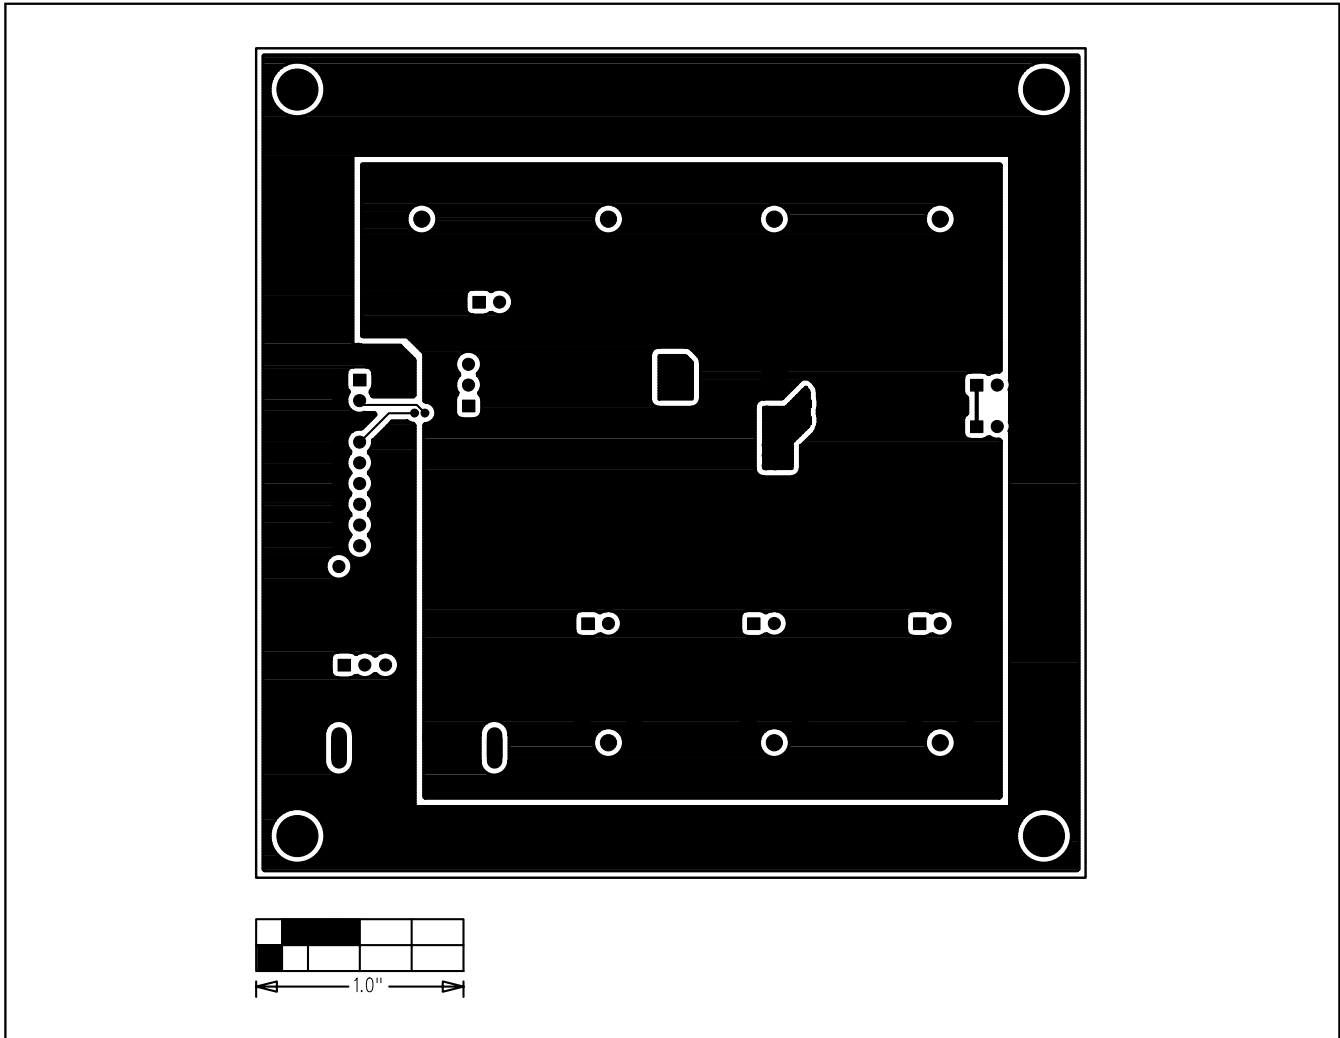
MAX7470 EV Kit PC Board Layout—Solder Side
